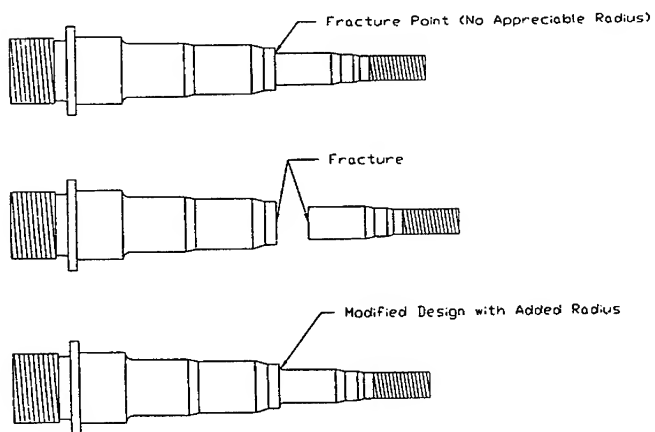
Fracture Point of the Bicycle Pedal Spindle
